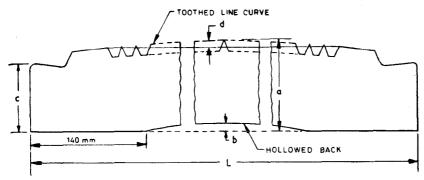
Overall Dimensional Details of Cross Cut Saw
